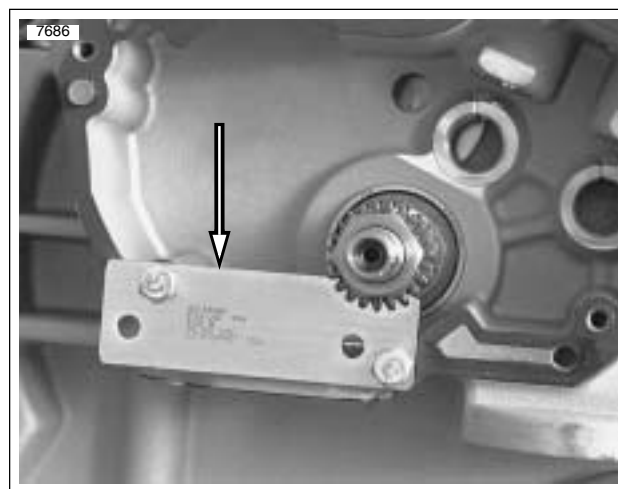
Crankshaft Locking Tool (HD-43984)
